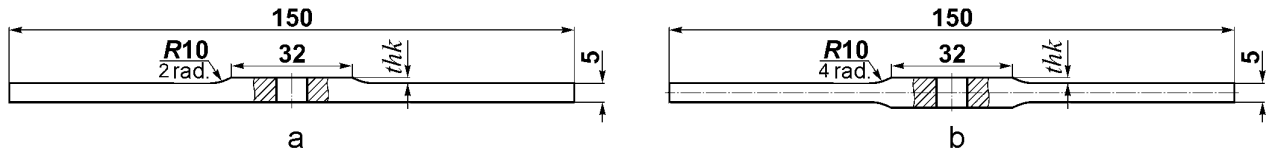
Geometrical Dimension of Strip with Hole:
